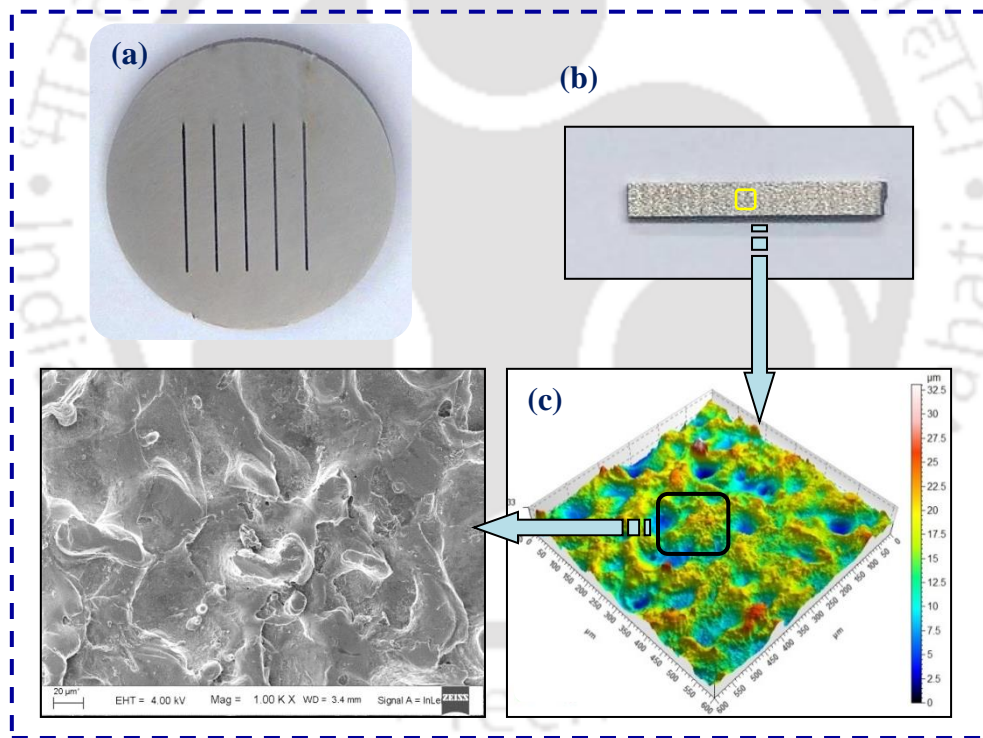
(a) Workpiece with microslots for abrasive flow finishing (b) surface of machined microslot (c) topographic image of the microslot surface.
